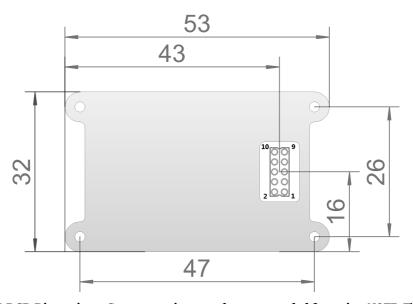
The piDOSE-DCD Dimensions, Connector pinout and recommended footprint. NOTE: The piDOSE-DCD is displayed from the TOP side. Pins from the through hole connector are aiming down through and below the system PCB. The SMD mount connector type HARWIN M22-6360542 is recommended. Dimensions are shown in millimeters. The unit is mount using four M2×8 screws (including 1.6 mm system PCB). Detailed STEP model available.
